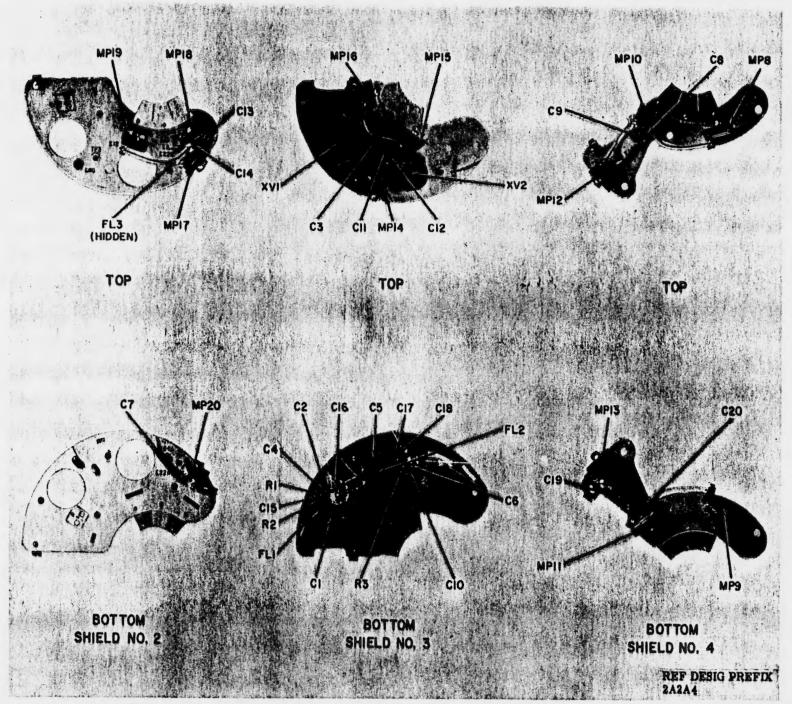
RF Amplifier Electronic Assembly, Internal Shields, Component Location
